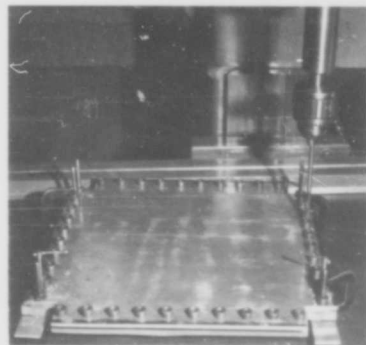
Reaming Holes to Size in Shear Strips of a D-36 Flat Structural Panel
